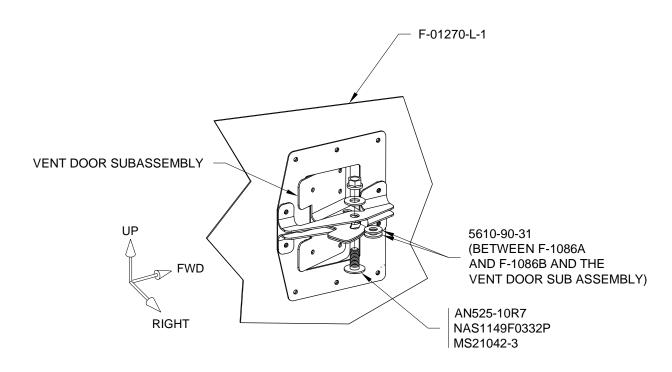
INSTALLING THE VENT DOOR SUBASSEMBLY
